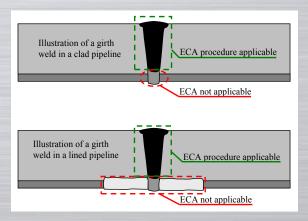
ECA procedures are only intended for use on weld defects in the filler pass. The reason for this is that an ECA for installation will typically accept flaw heights above 3mm. Such large defects cannot be accepted in the weld root due to fatigue concerns and loss of corrosion resistance.
